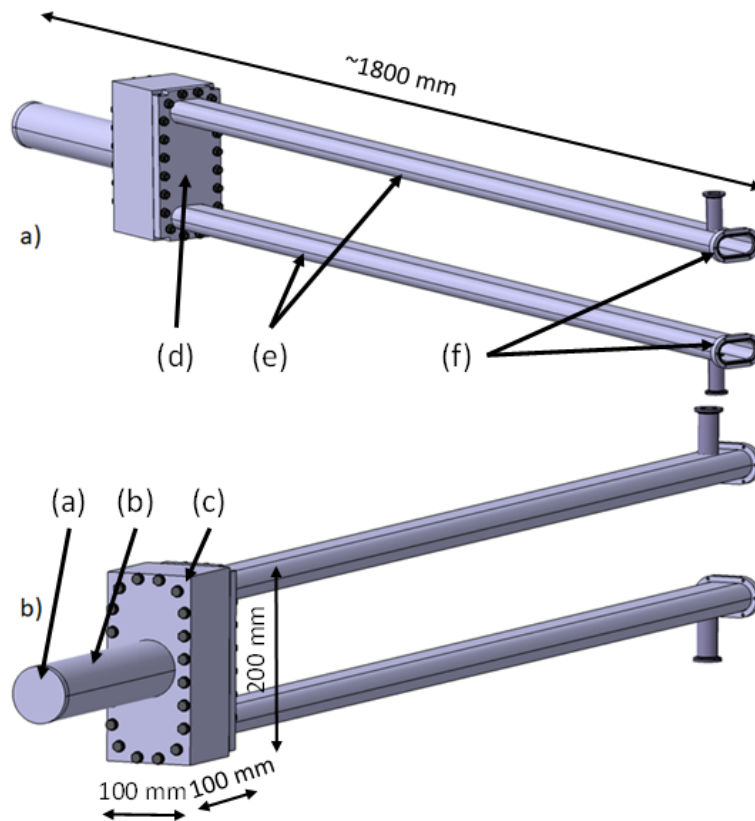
CAD model of the cryostat's vacuum recipient. Isometric back (a) and front (b) view.
